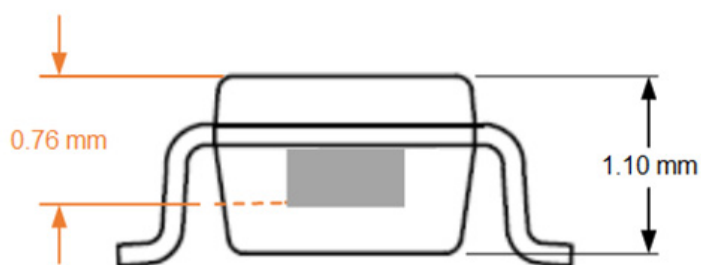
XtremeSense TMR Sensor Location in z Dimension for CT100 in SOT23-6 Package
